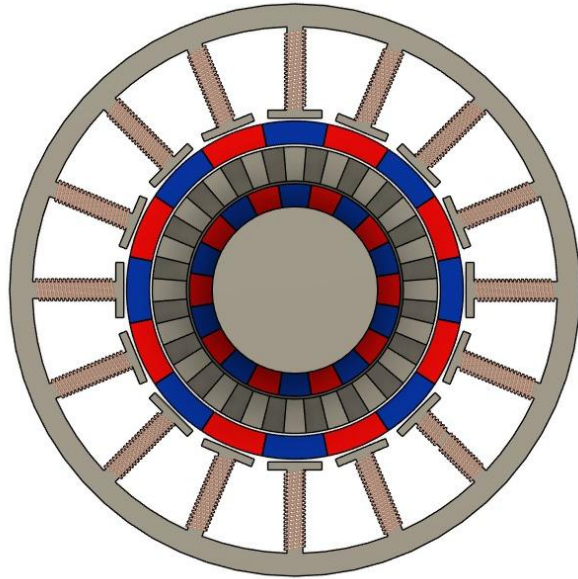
2D cross-sectional view of a Coaxial Magnetic Gear (CMG) with outer motor system.
